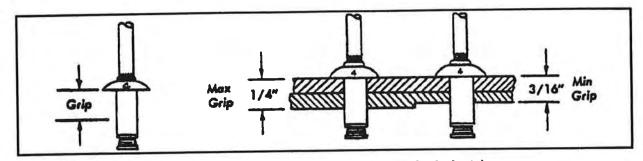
Grip length (bulbed Cherrylock rivets)
